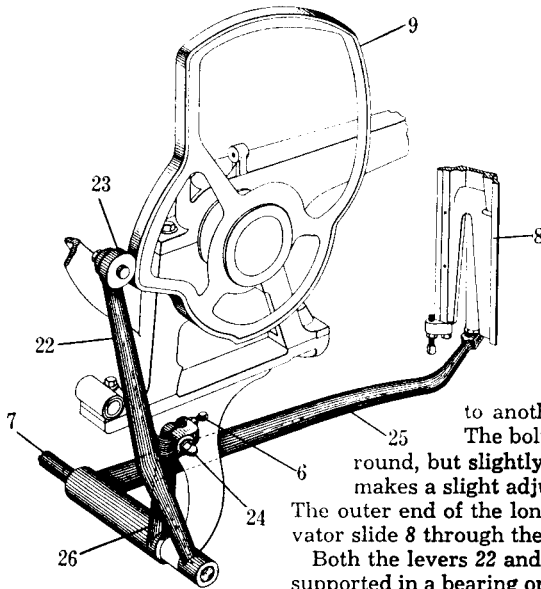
View of the first elevator slide cam. In this view 9 is the cam surface. This surface has a very peculiar shape and gives to the first elevator five different movements in the course of one revolution of the cam shaft.
